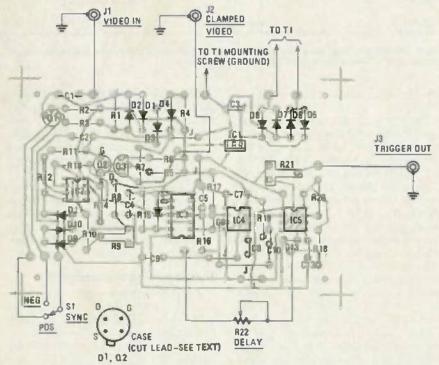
PARTS PLACEMENT DIAGRAM. Note that before you install Q1 or Q2, you should cut the case lead. Also note that the board's ground should be connected to a transformer mounting screw.
